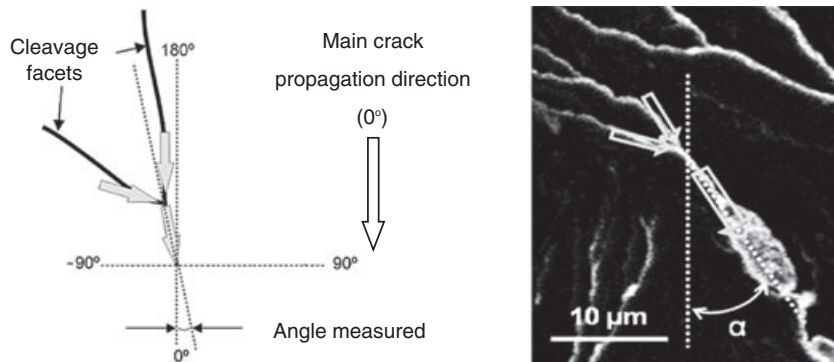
Method used to define a local propagation vector on the cleavage fracture surfaces resulting of impact and bending test.
